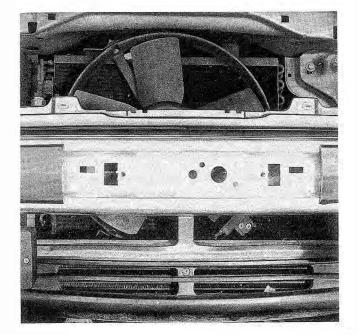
Auxiliary cooling fan assembly viewed from front. Shown with grille removed for clarity.
